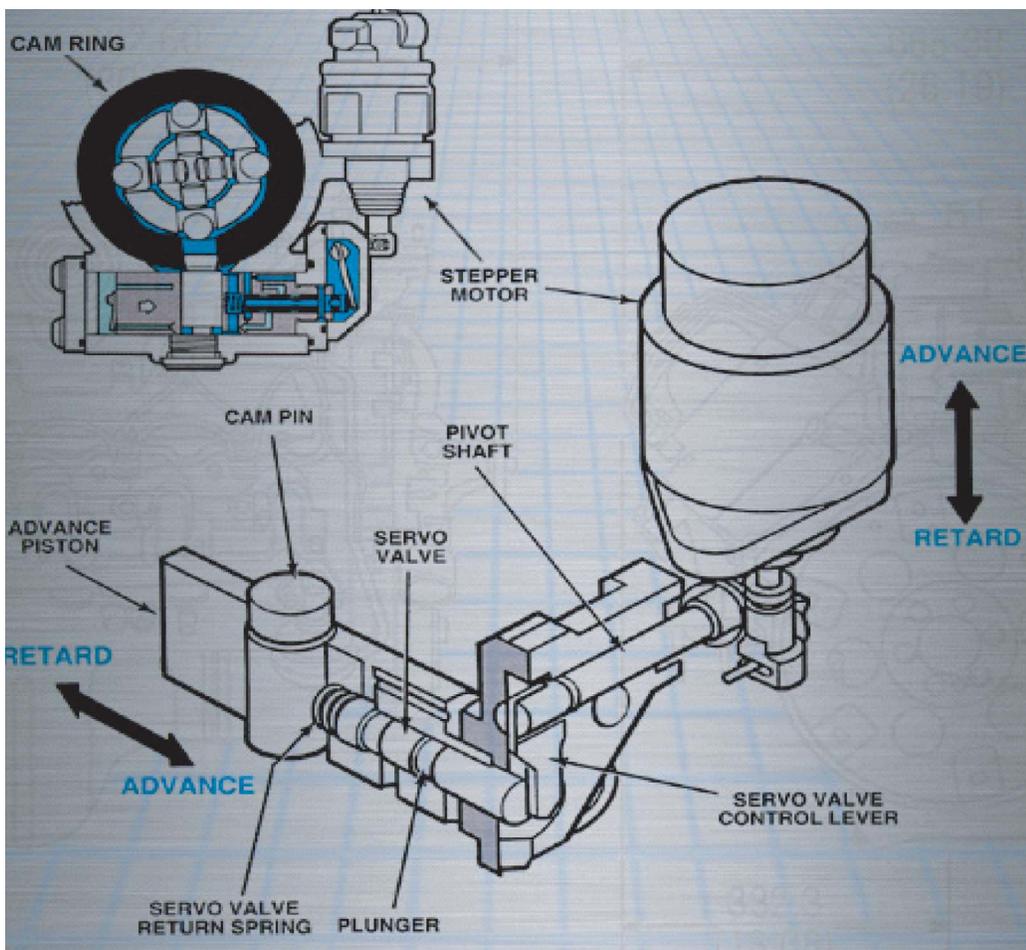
, Injection Timing Stepper Motor/Advance Piston Components
